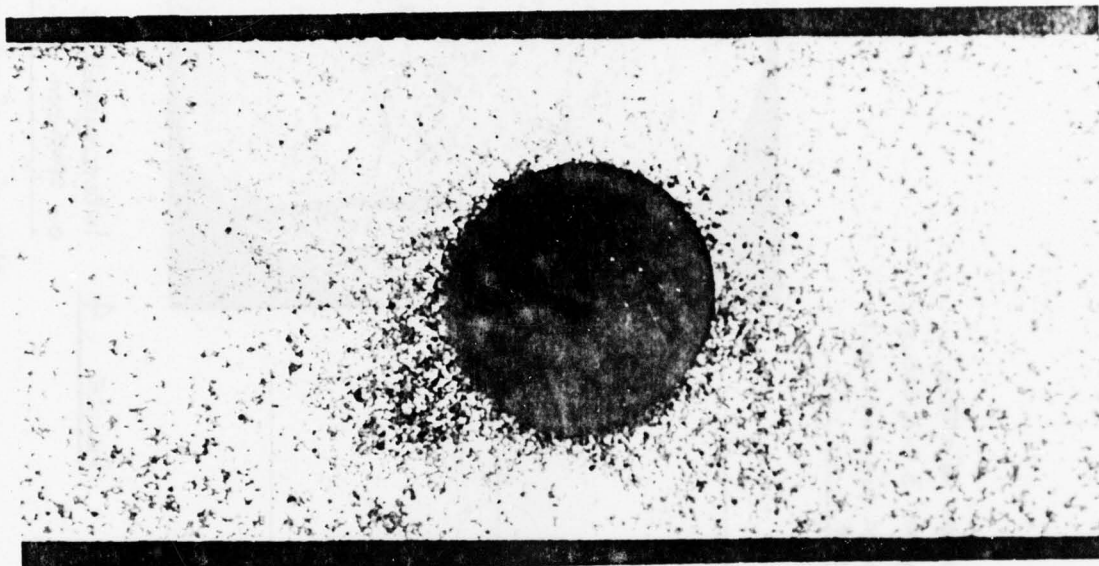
A - Uniform Attack up to pin (specimen 5.19.D)
